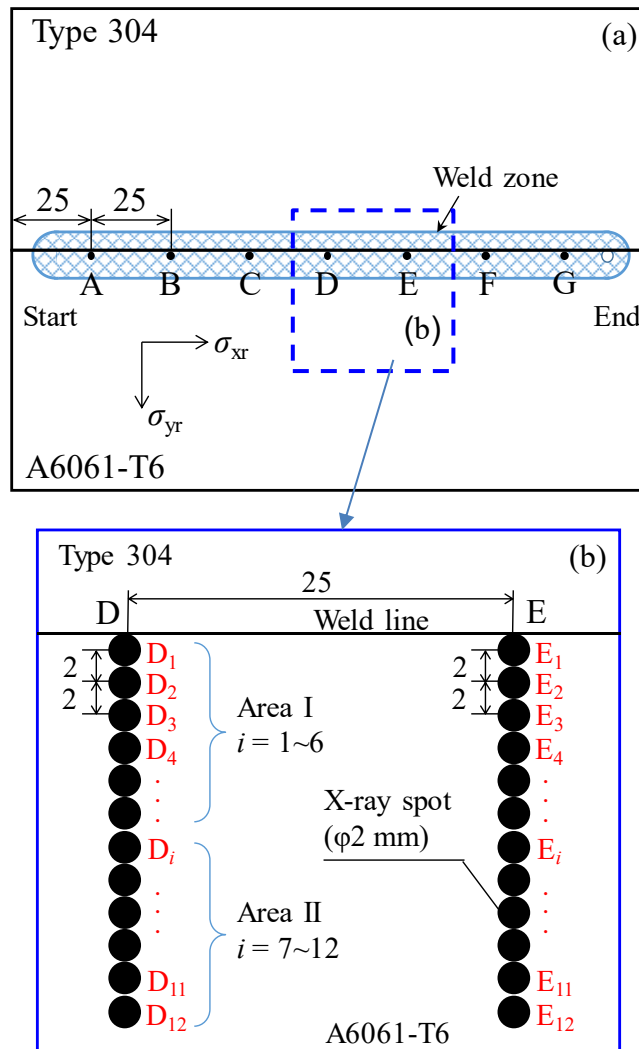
Schematic illustration showing the locations of residual stress measurements: (a) Along the weld line, (b) Perpendicular to the weld line.
